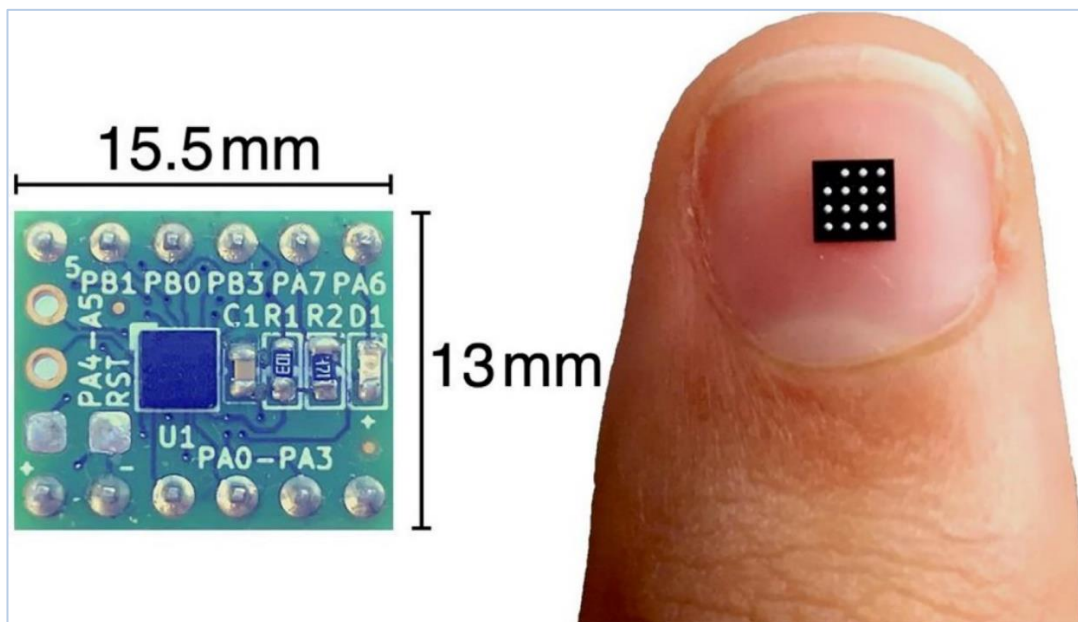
Breakout Board for a Ball Grid Array (BGA) Microcontroller
